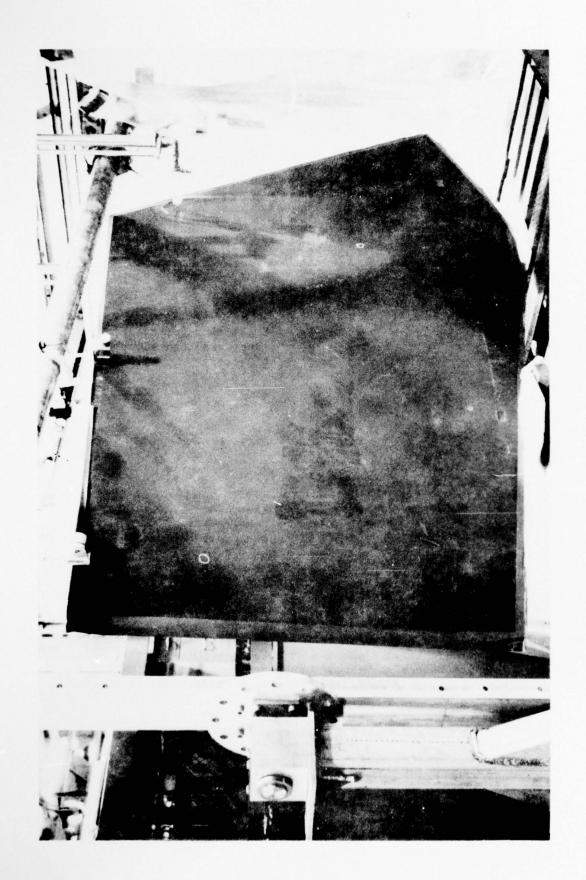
ULTRASONIC INSPECTION OF LOWER SKIN SANDWICH PANEL
